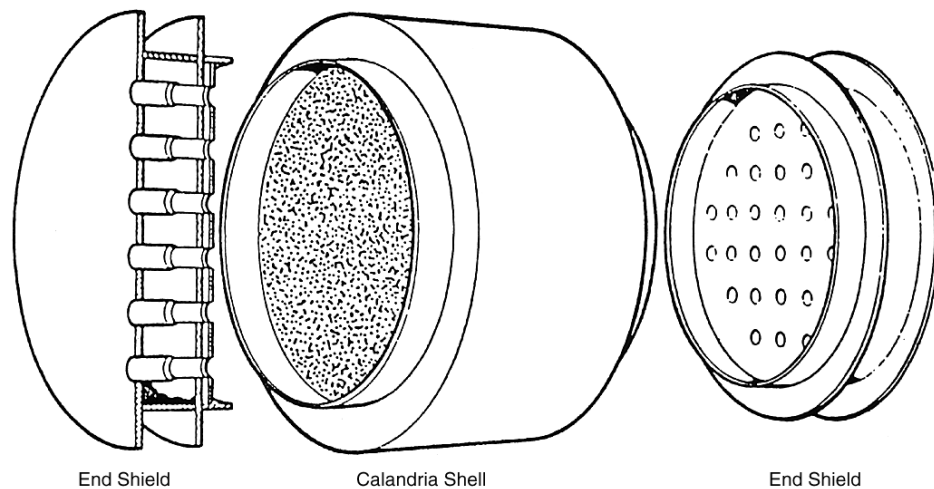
shows a view of a reactor assembly. The calandria vault contains the calandria vessel. Figure 5.4 is an exploded view of the calandria. This is a large cylindrical tank containing the perforated end shields. The end shields are joined together by lattice tubes and are cooled by a light water circuit separate from the moderator circuit. The vessel is made of an ASME grade 304L austenitic stainless steel plate. Use of this grade of stainless steel with compatible welding processes and the lower temperature of operation has avoided the problems that have faced BWR piping with cracking in 304 piping welds.
